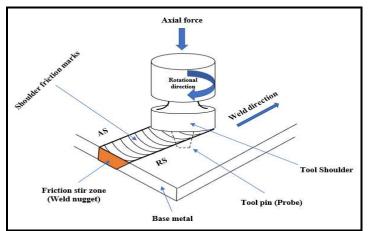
A schematic of main weld parameters used in FSW process and its tool parts
